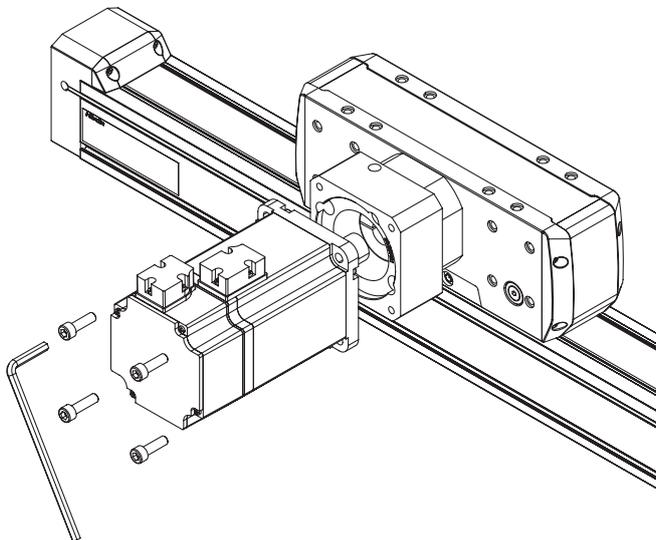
Bolting the motor to the cantilever axis HC-B
